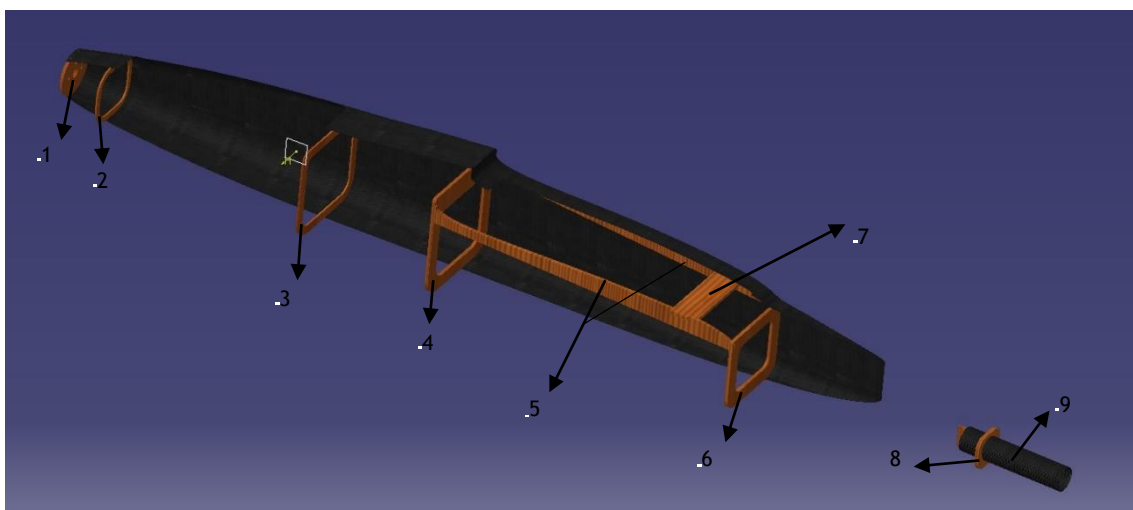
Fuselage internal structure (1-Motor frame; 2-Cover frame; 3-Cover frame; 4-LE frame; 5-Stringers; 6-TE frame; 7-Wing screws reinforcement; 8-Frame tube; 9-Fuselage tube).
